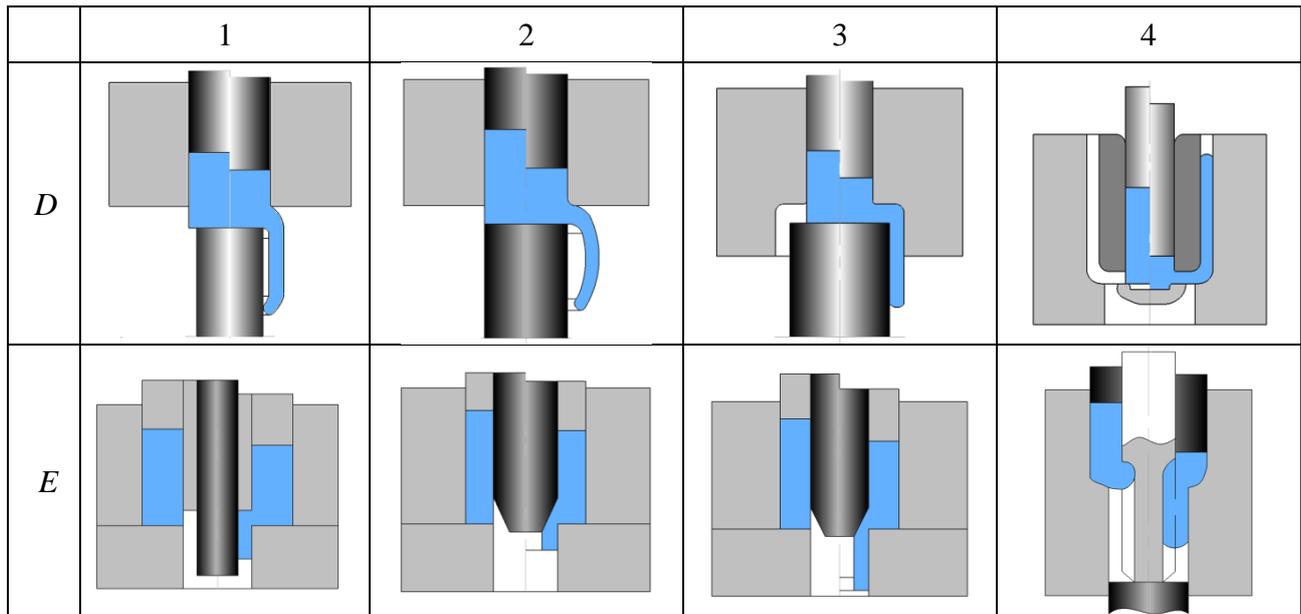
Methods of sequential combined radial-longitudinal extrusion
